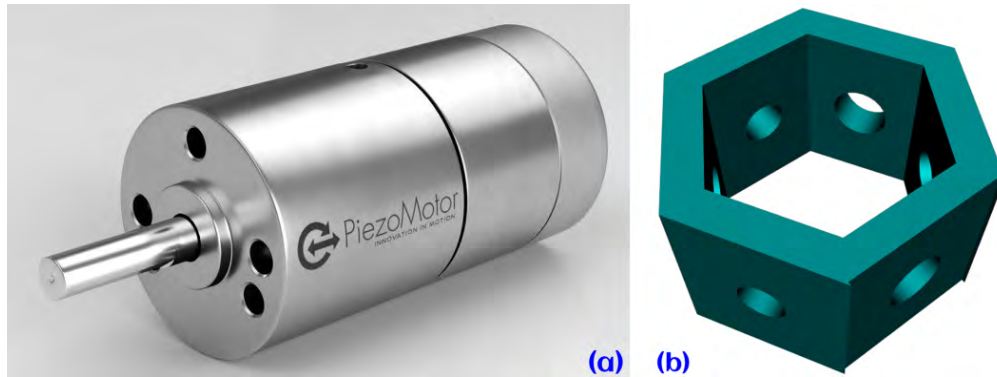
(a) Piezo motor (b) 3D printed holder for the piezo motor.
